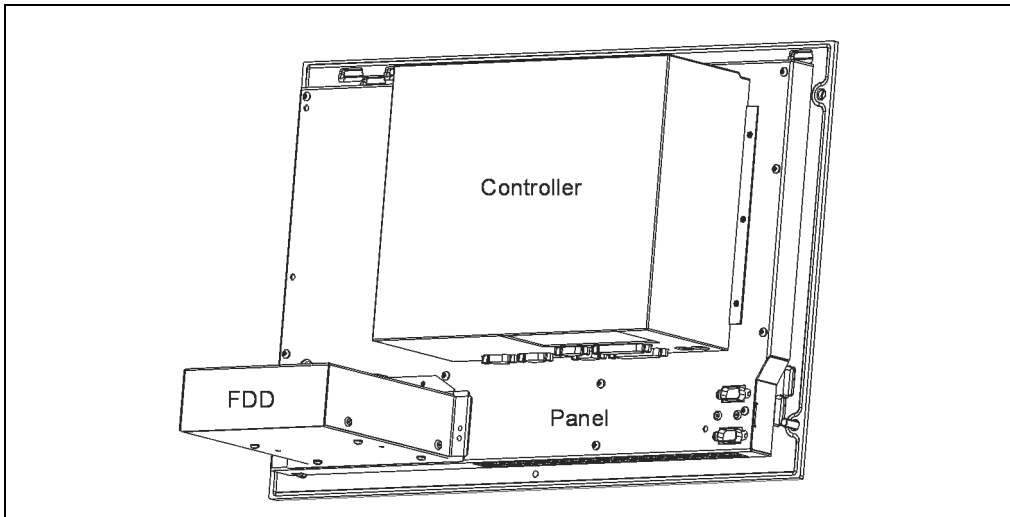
Mounting example of an FDD 5A5600.03 with controller on a panel
